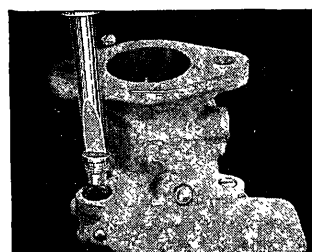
Install check valve passage plug and strainer, using new copper washer
